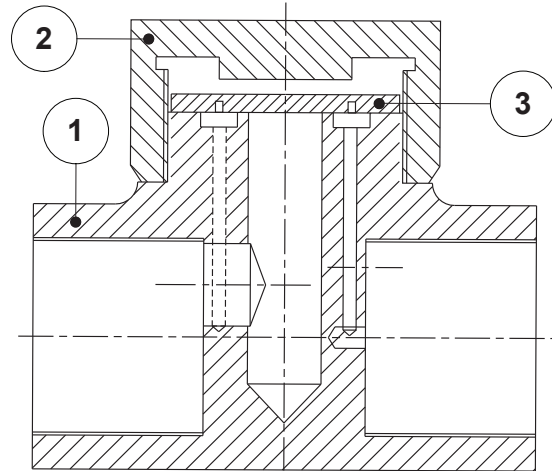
NTD600 Series Steam Traps Assembly Drawing
